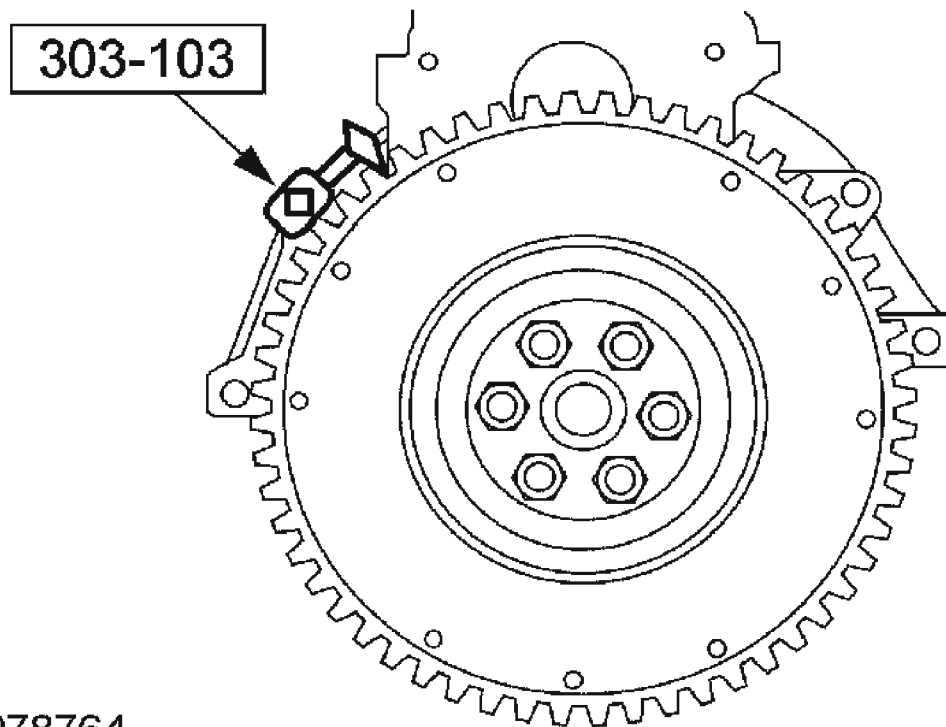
Removing Bolts, Clutch Pressure Plate And Clutch Disc
